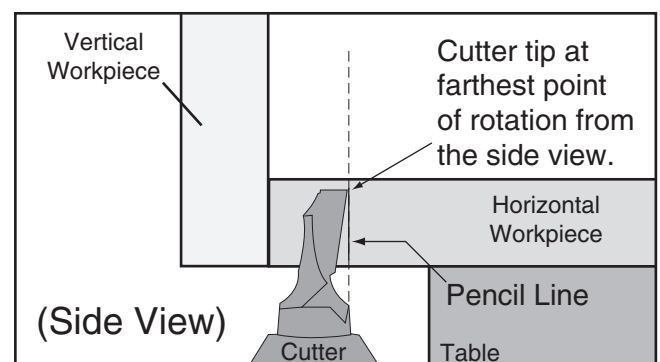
Cutter position to set cutter depth stop (viewed from the side).
